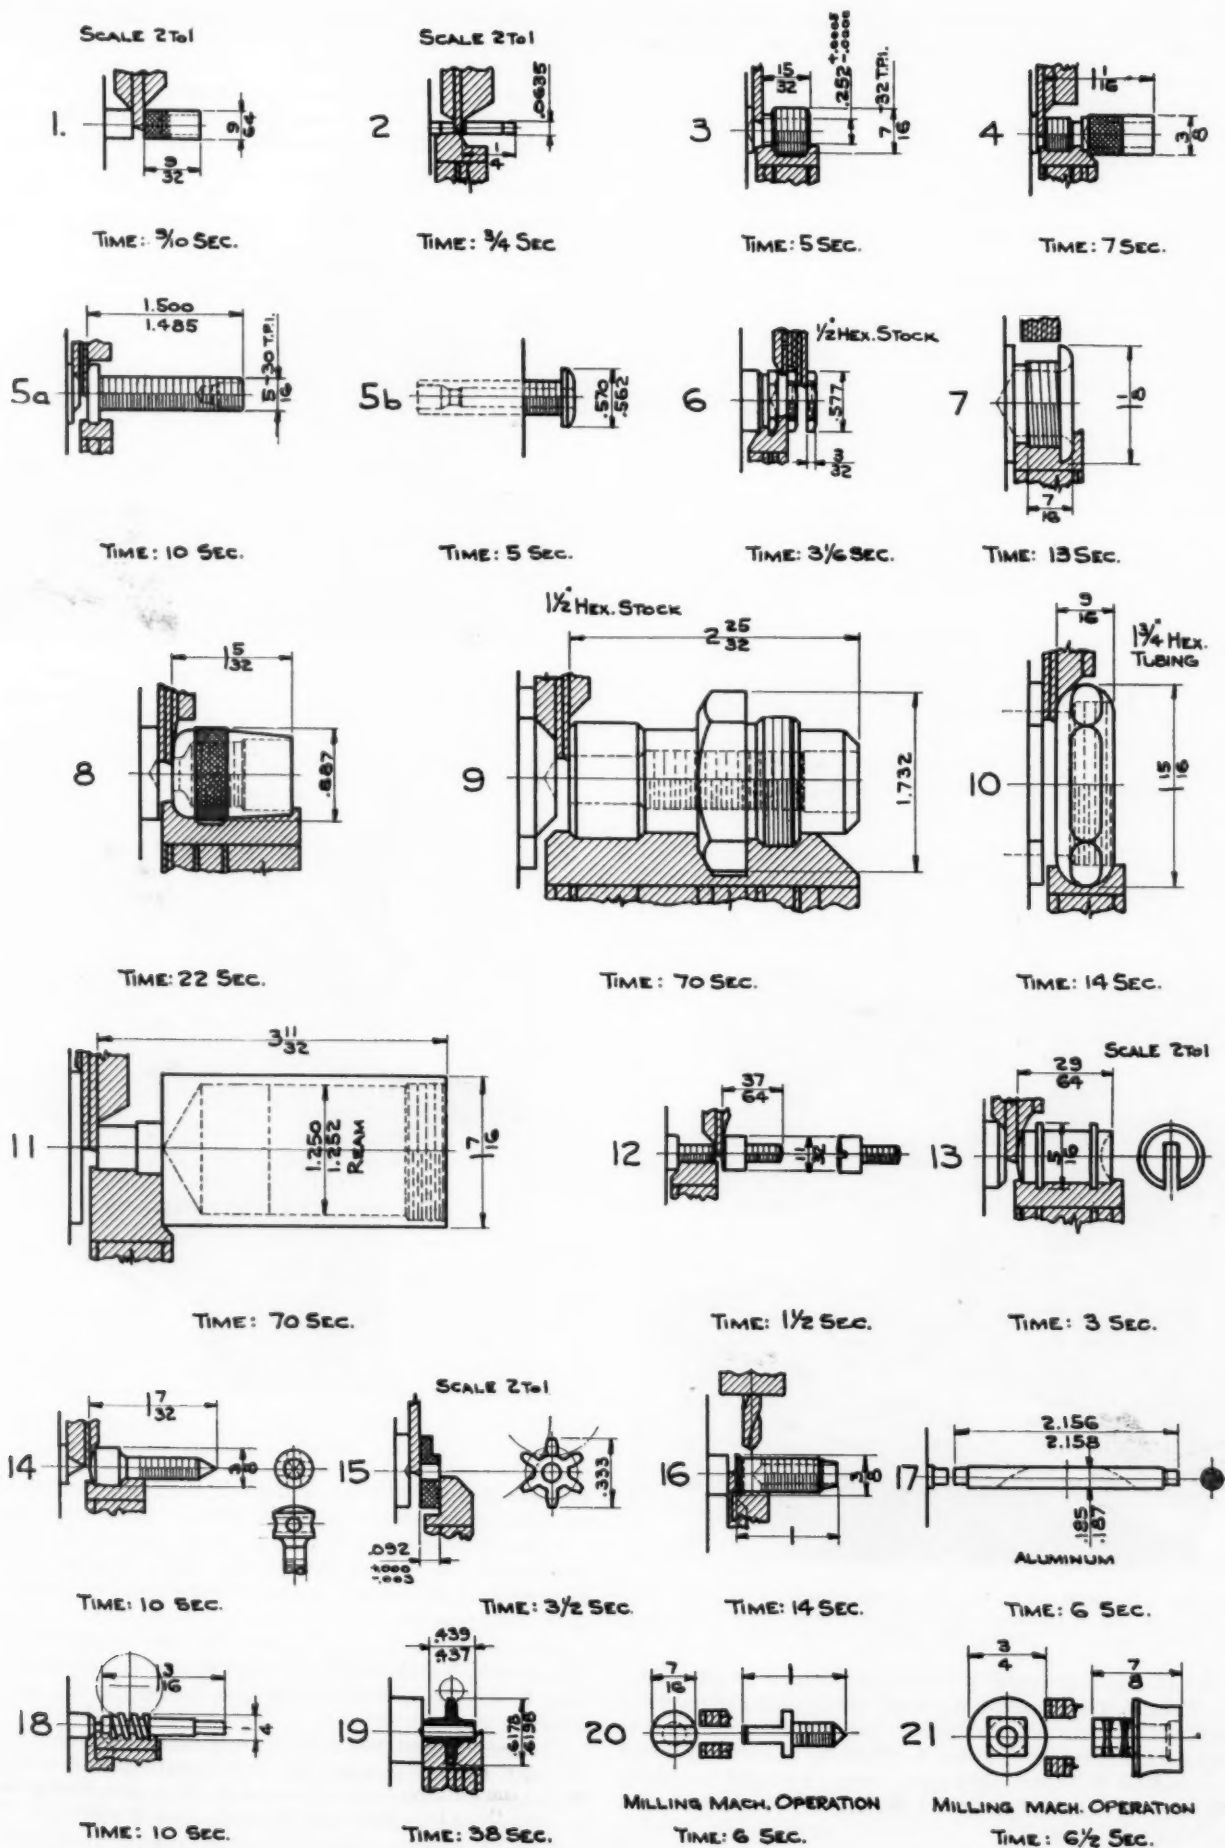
EXAMPLES OF WORK DONE ON THE SCREW MACHINE
